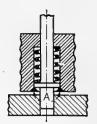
In this design, the plunger is retained by staking or spinning over the hole at A.
